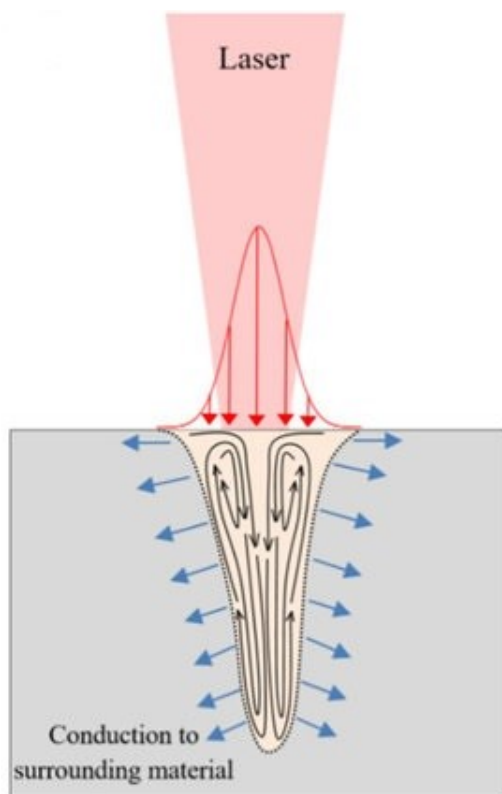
Schema of laser keyhole welding process (Balbaa et al., 2020)
